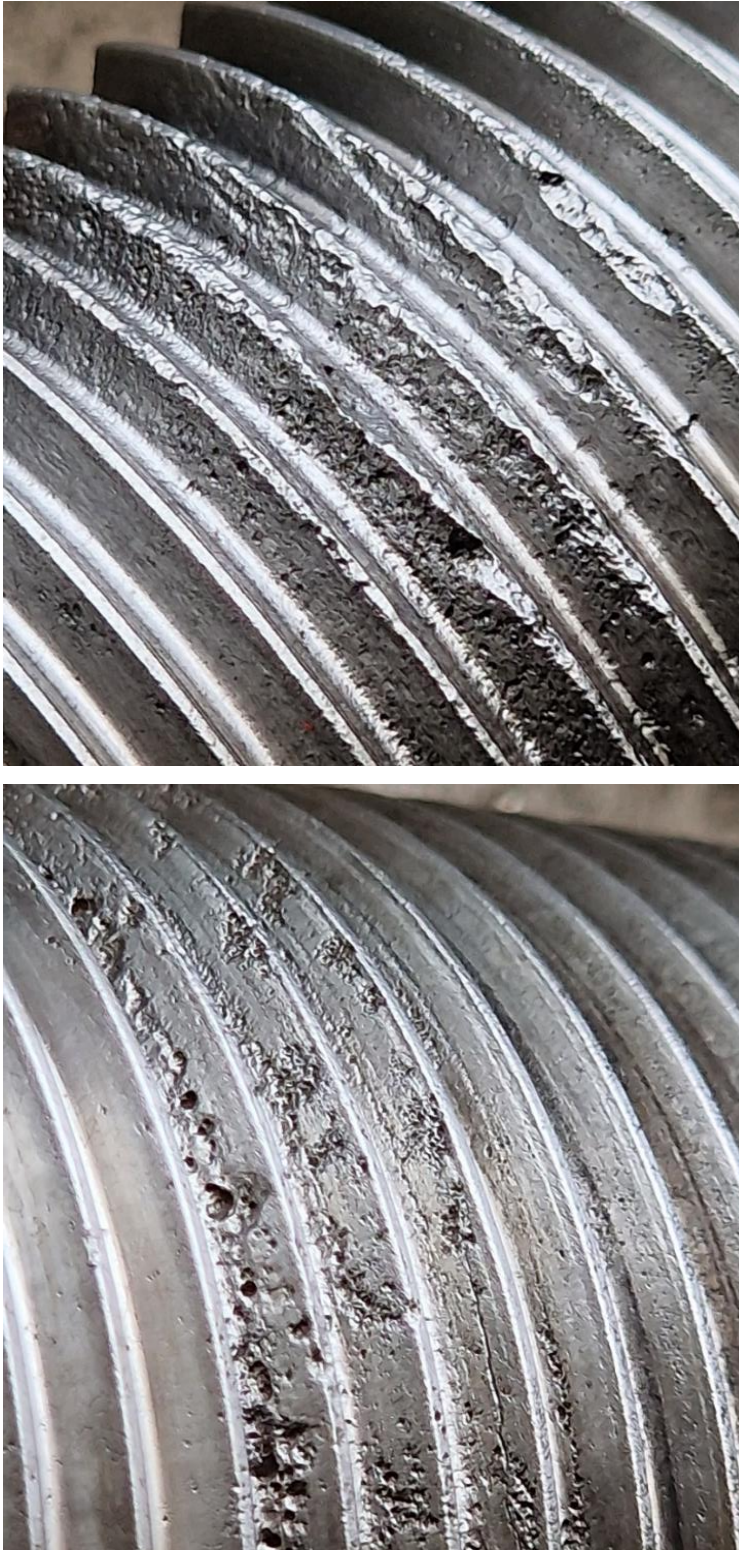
Corrosion in threads of one of the unbroken bolt heads.
